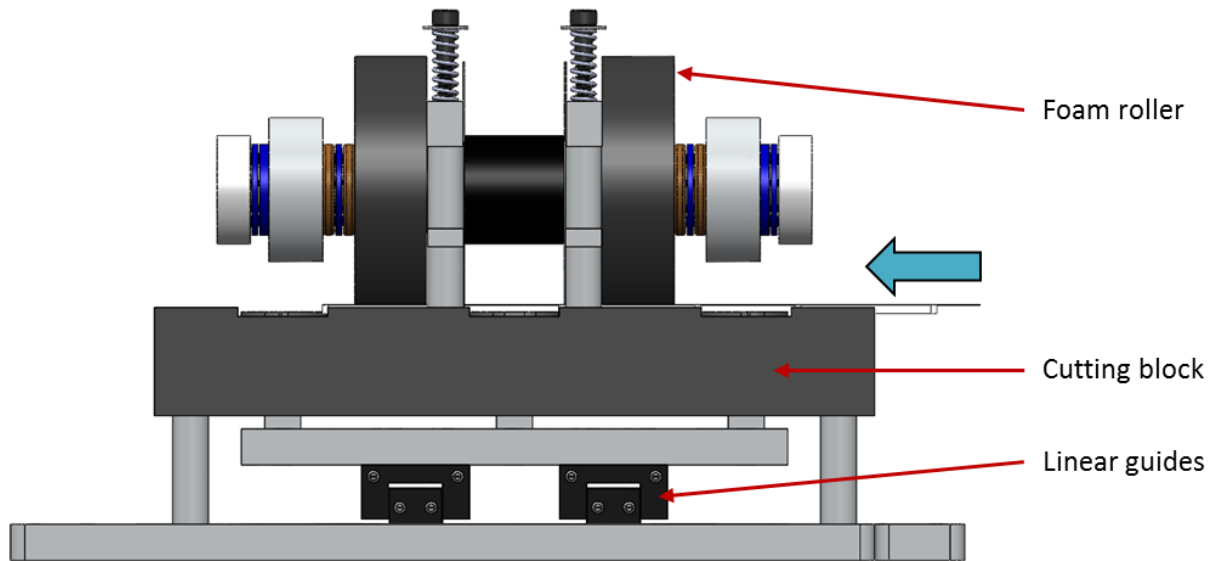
Front view of the tape cutting assembly. The chips move from right to left. The alignment fork and blade assembly are guided by linear rails mounted to the base below the cutting block and move forward out of the page. Foam rollers on the outside of the spring-loaded rails keep the chips in position as they are cut.
